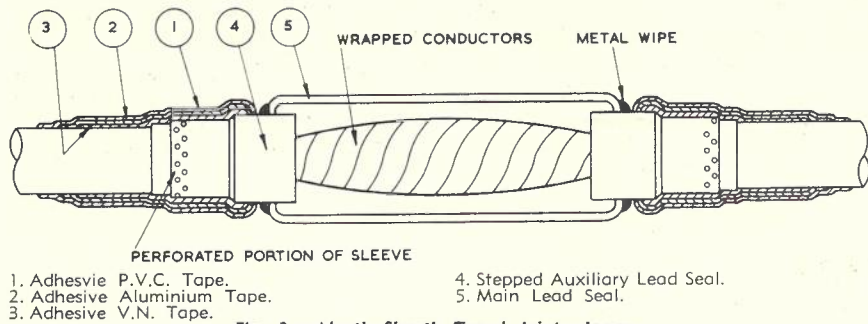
Alpeth Sheath Taped Joint—Japan.
